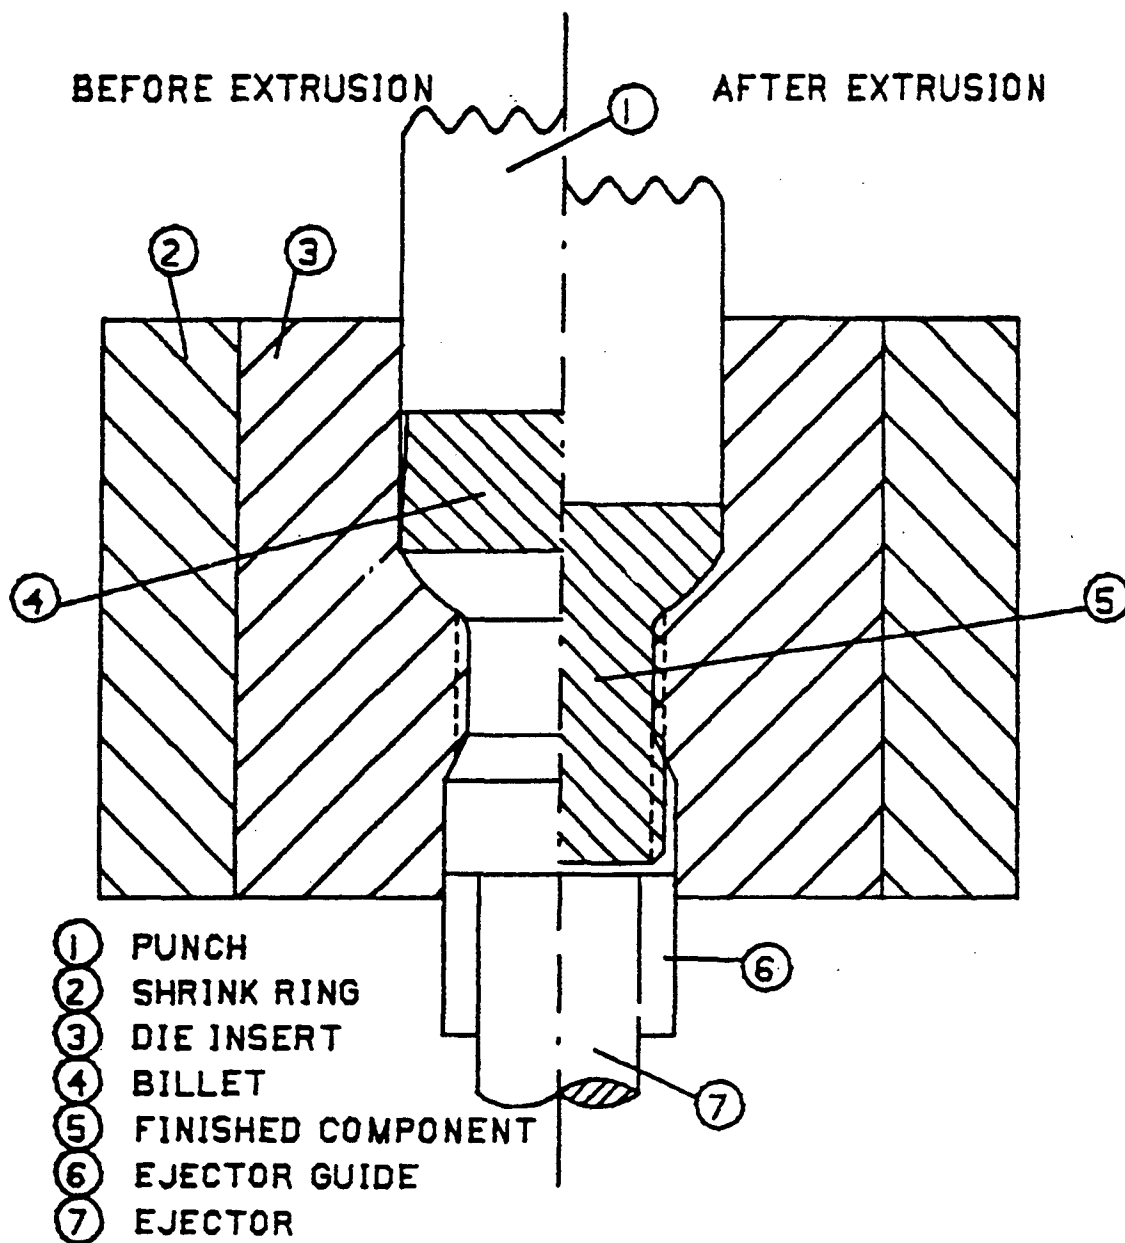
Typical Tool Setup for Extruding Spur or Helical Gears
